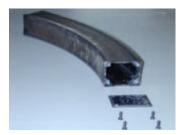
HSS casing machined extremity, closing plate and fasteners
